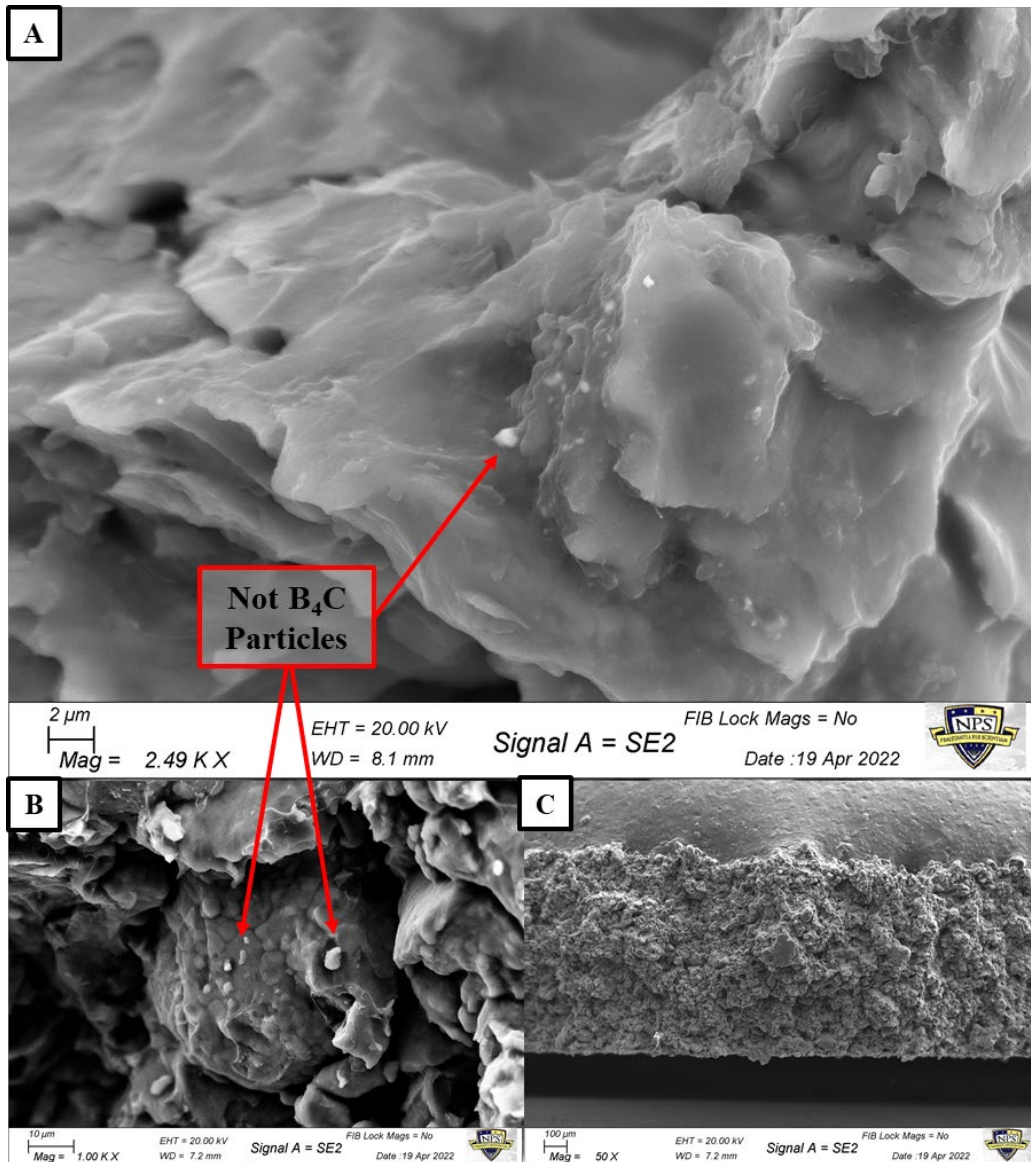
Al Only adhesion fracture surface showing, a, b) pure Al coating, and c) entire fracture surface
